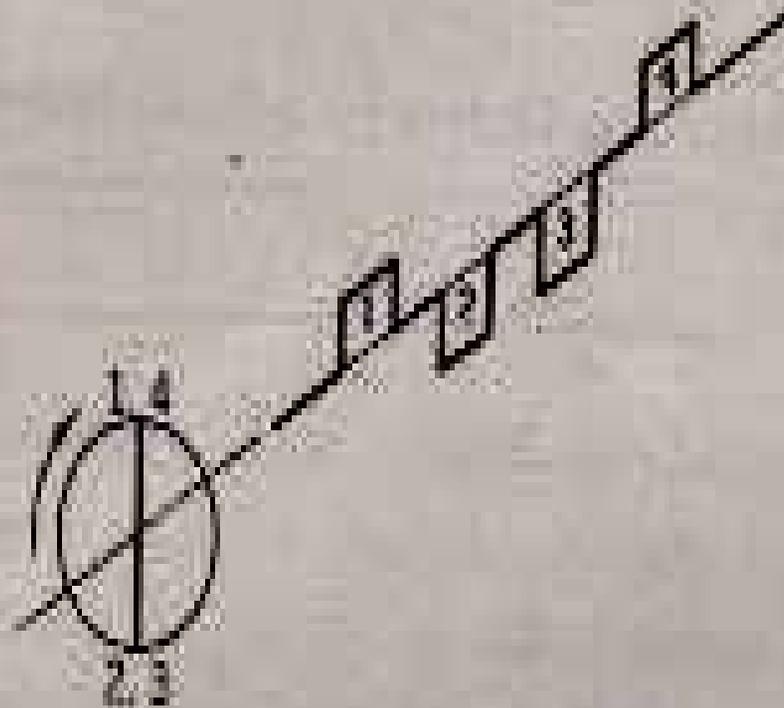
Crankshaft arrangement for a four-cylinder engine.
